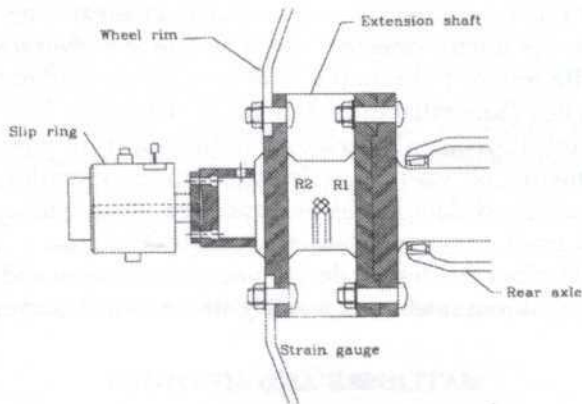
The arrangement of wheel torque transducer on drive axle shaft
